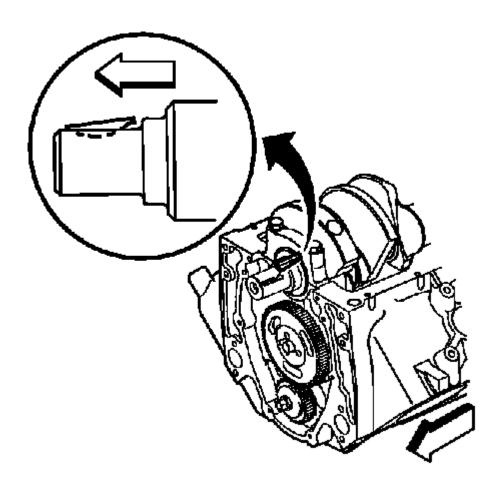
Installing Crankshaft Balancer Key Courtesy of GENERAL MOTORS CORP.
